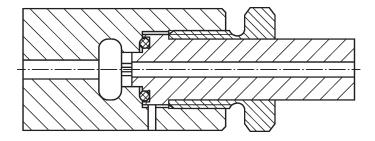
500 bar gas withdrawal connection — Assembly drawing
